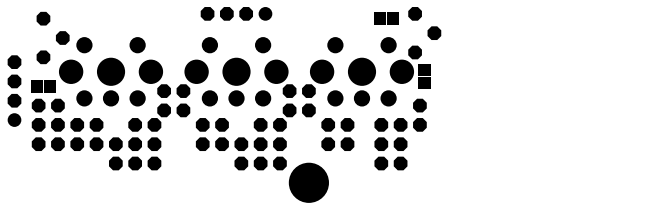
1 MHz 16-bit A/D board top solder mask.
